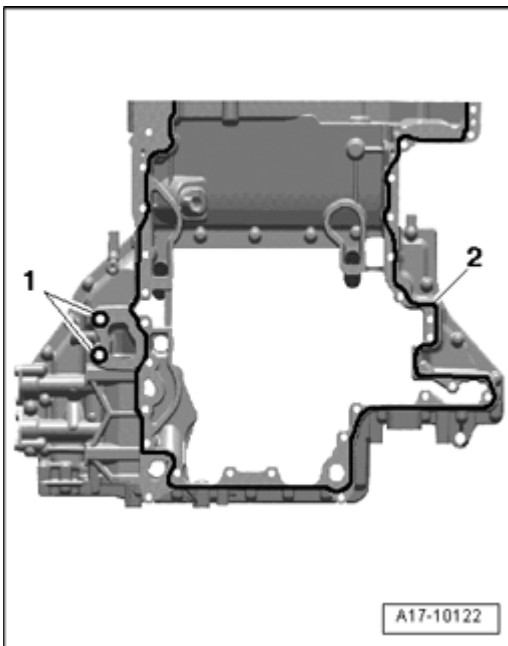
Applying Sealant Beads On Clean Sealing Surfaces Of Upper Part Of Oil Pan
